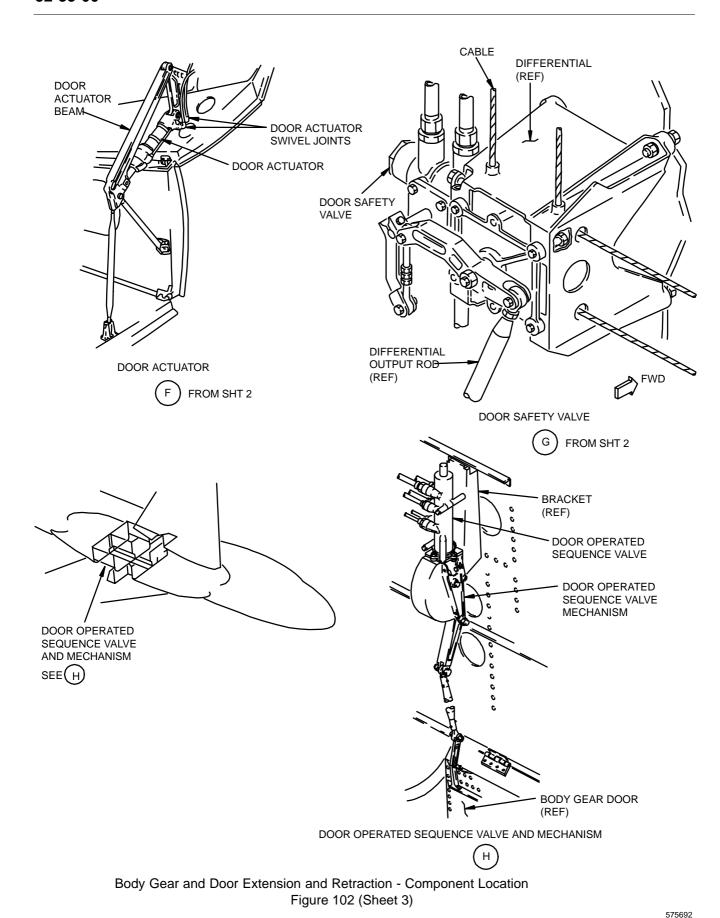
32-33 Body Gear and Door Ext./Ret. Comp. Location Fig. 102 (Sheet 3)
